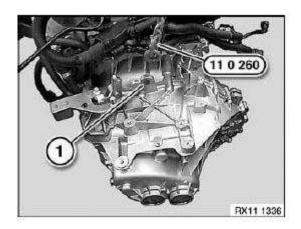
Engine Lifting Eye And Special Tool (11 0 260) Courtesy of BMW OF NORTH AMERICA, INC.
